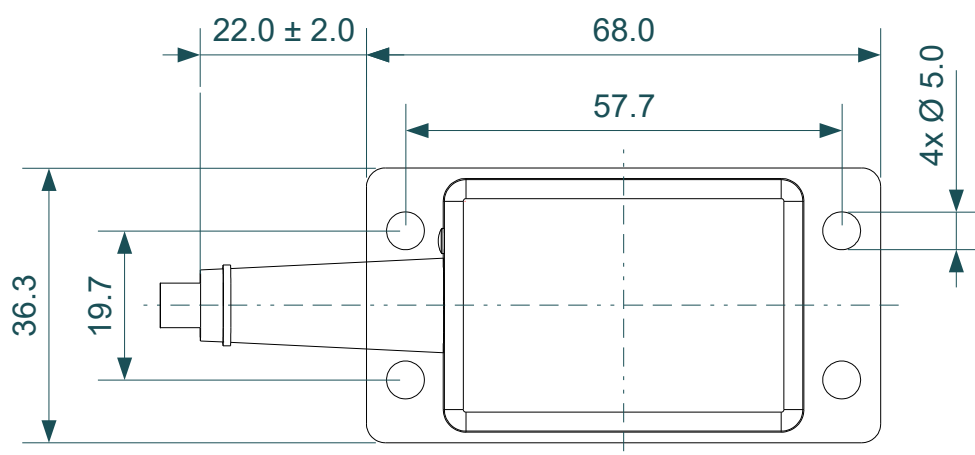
Dimensioned Sketch of small plastic housing (SP) with cable (dimensions in mm)
